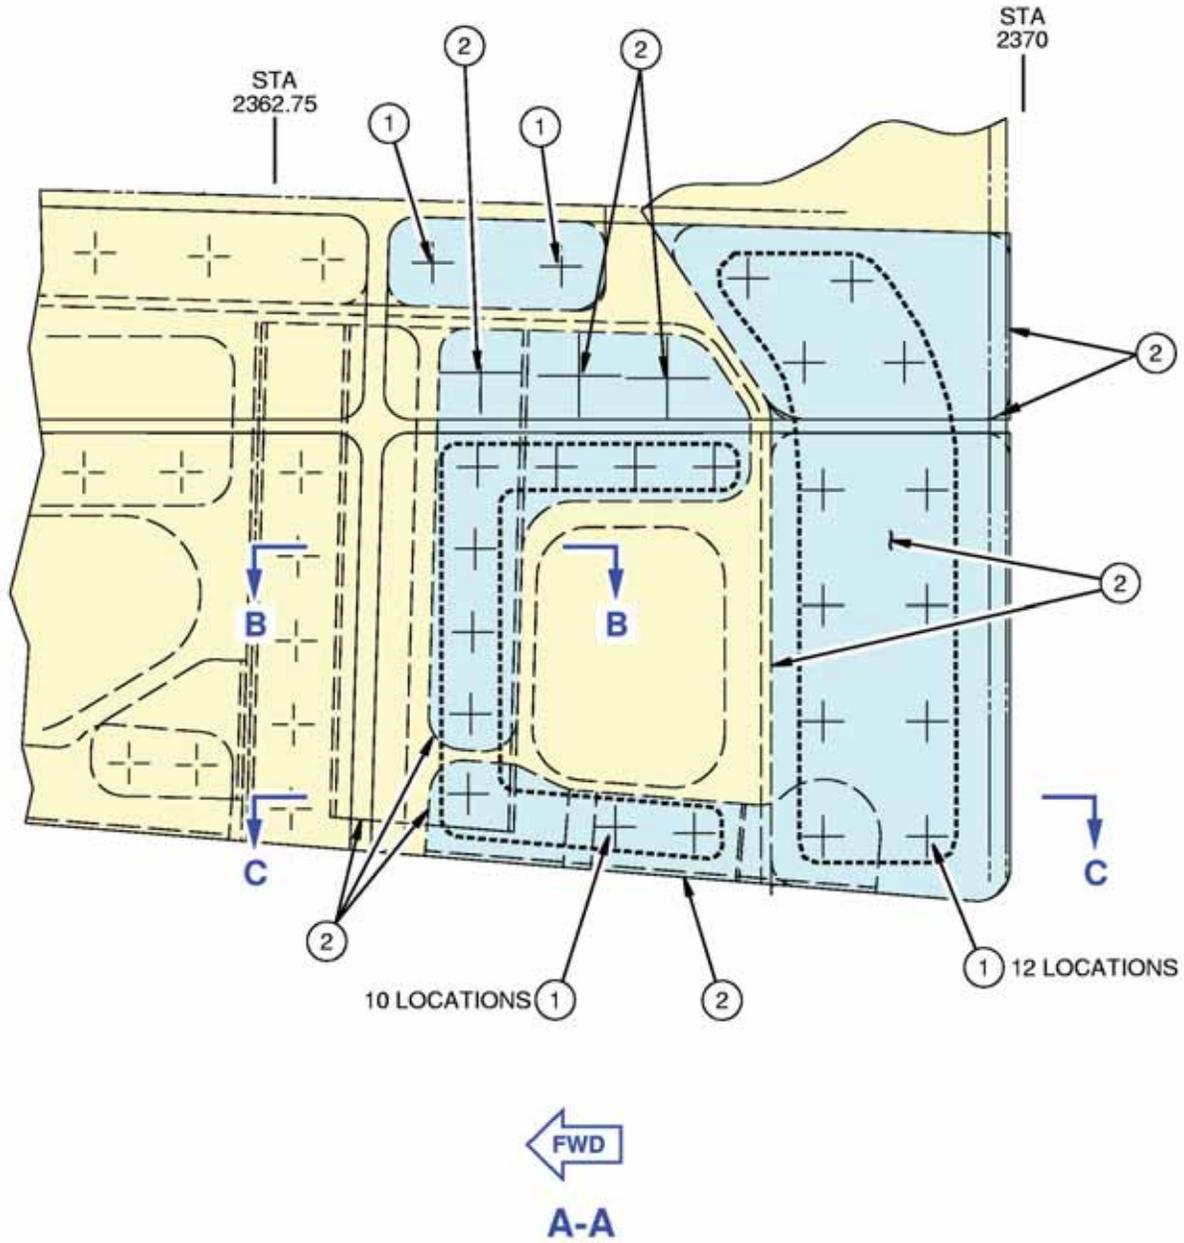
LEFT SIDE - STA 2370 SKIN PANEL REMOVAL (SHEET 1 OF 4)
